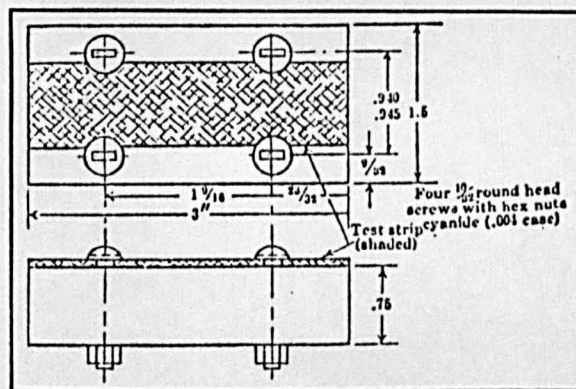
Holding fixture for shot peening test strip; units in inches. (after Almen (72))
